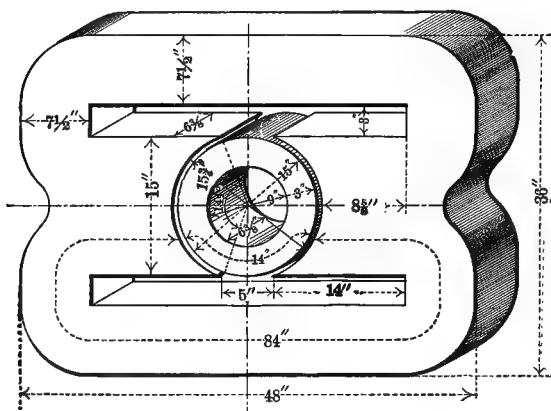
Dimensions of Armature Core and Field-Magnet Frame, 15-HP Bipolar Iron-Clad Type Shunt Motor.
